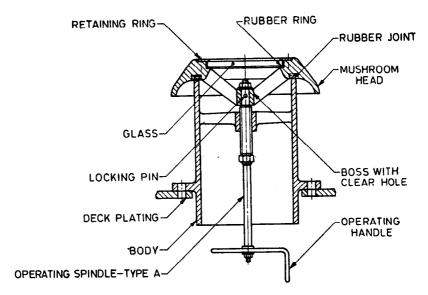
ASSEMBLY OF CAST IRON TYPE MUSHROOM VENTILATOR WITH CLASS TOP
